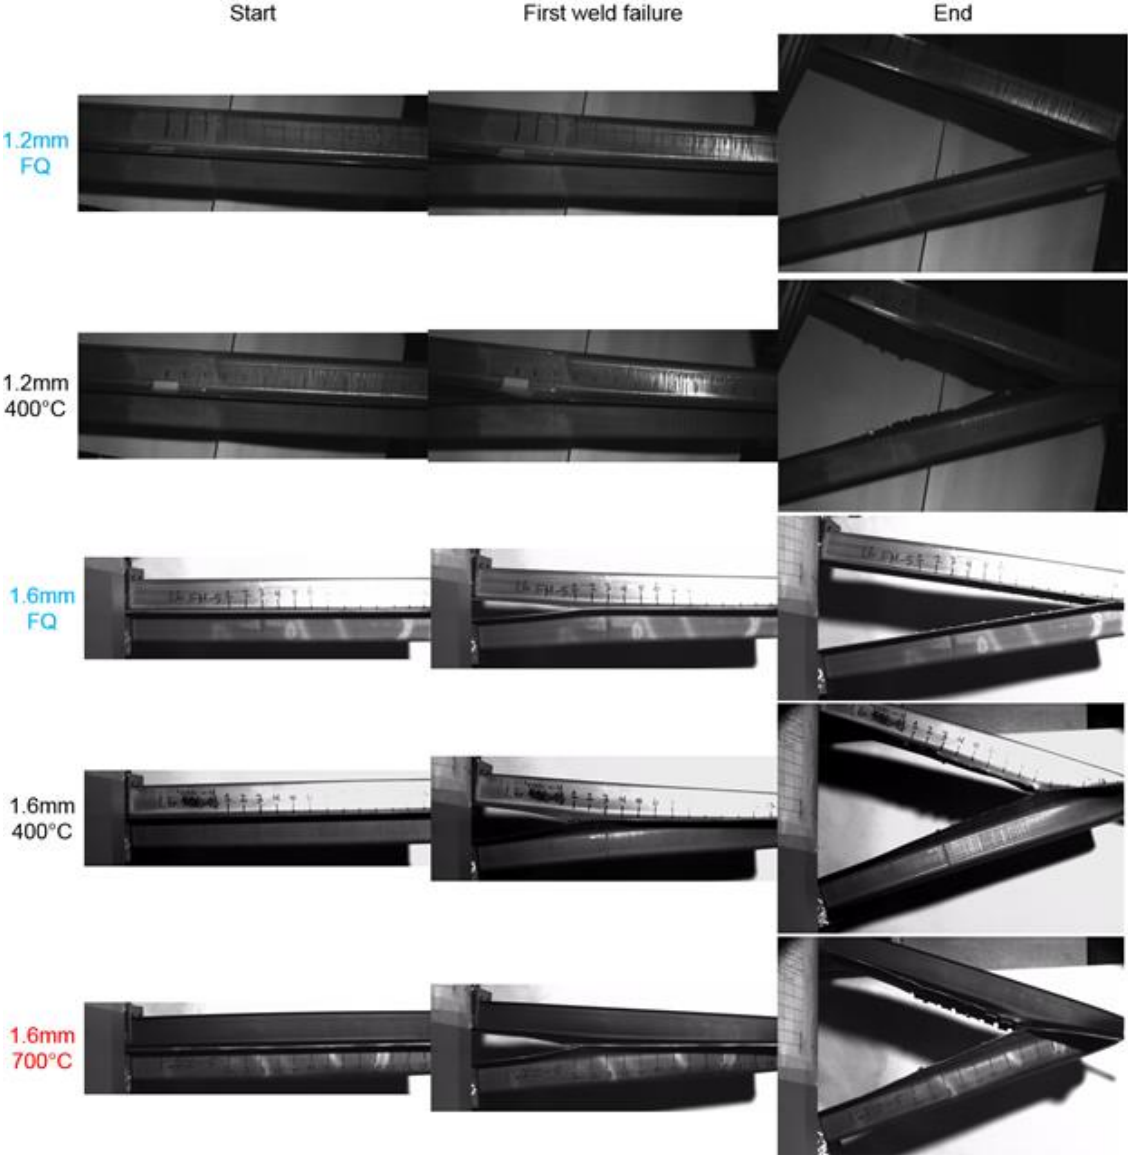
Side images taken at the start (left), first weld failure (center), and end (right) for all 1.2 mm (top) and 1.6 mm (bottom) quasi-static forming conditions
